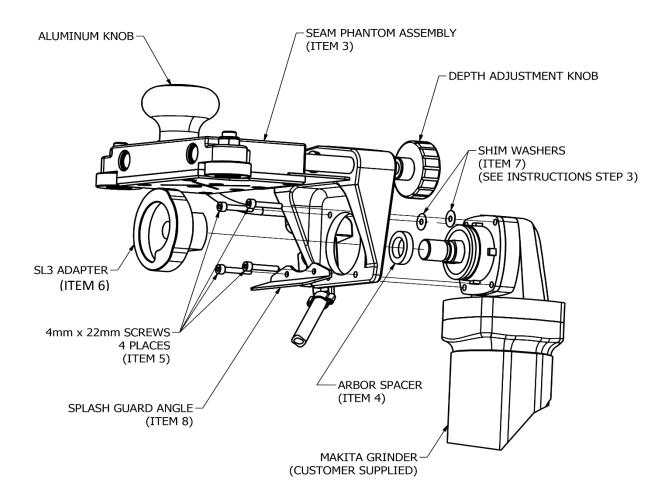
Assembly Exploded View, Electric (Spray Skirt not shown)
